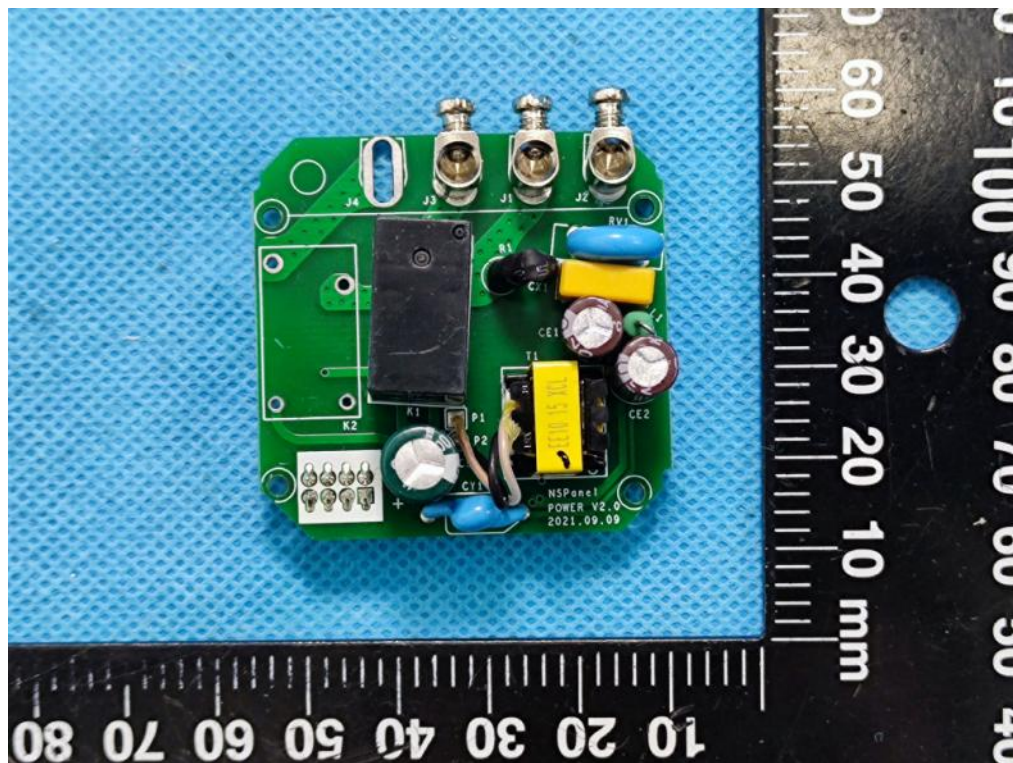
PCB top view of power bard(Model: M5-1C-80)
